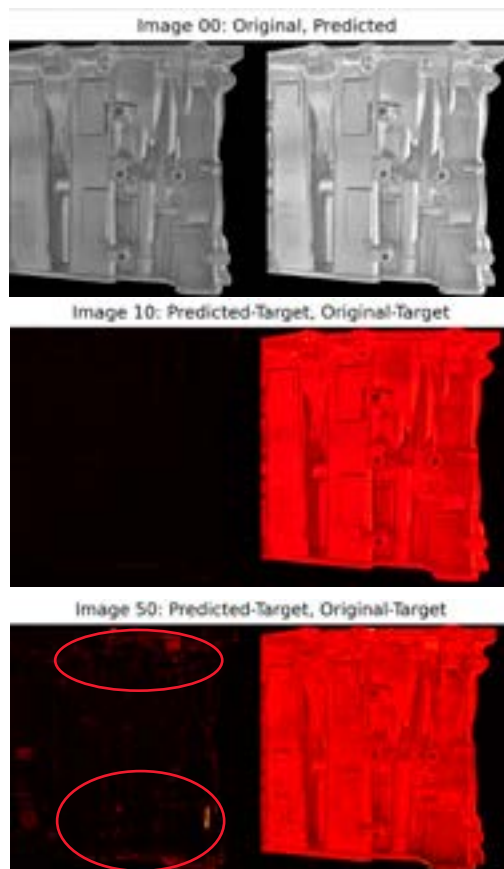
Shows the scanned image of an OK casting -0-, along with the second image of the heat map for casting -0-. The third image is the heat map of casting -50- with the defect areas shown in the red circles.
